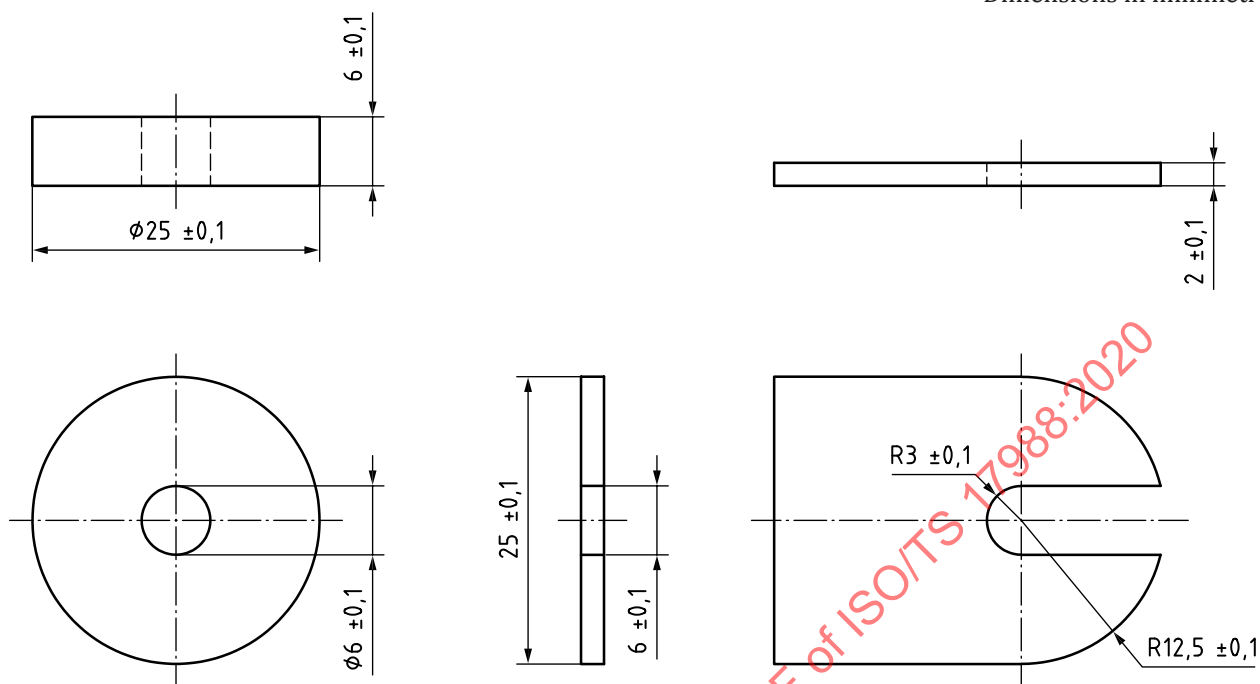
Spacer no. 1 (left) and spacer no. 2 (right)
